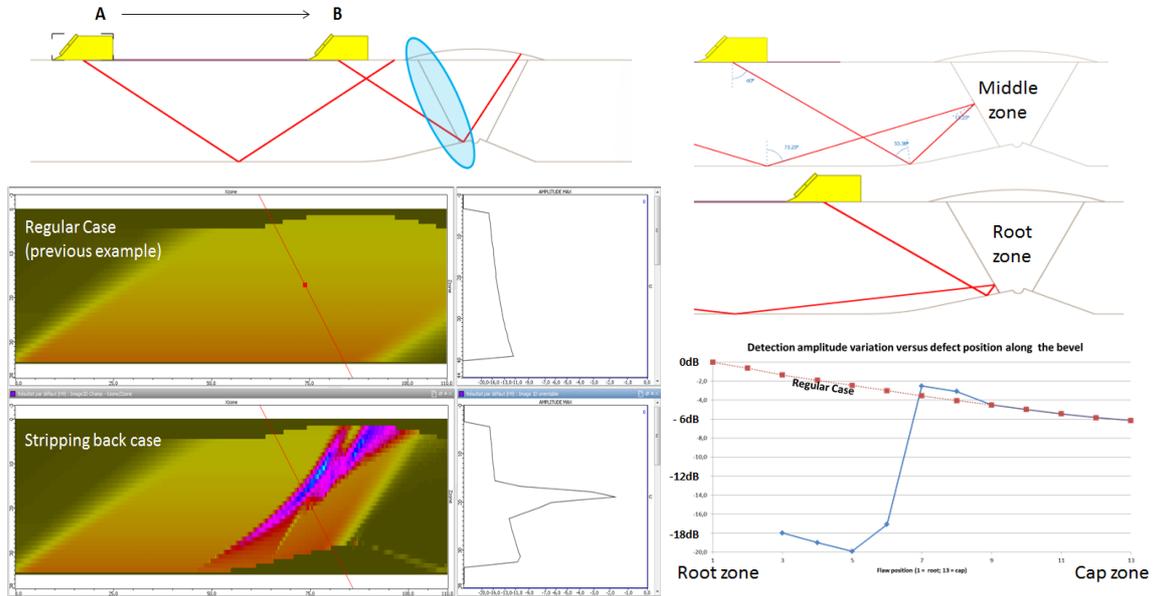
V-weld inspection with a conventional 60° shear-waves probe and a stripping back close to the weld
